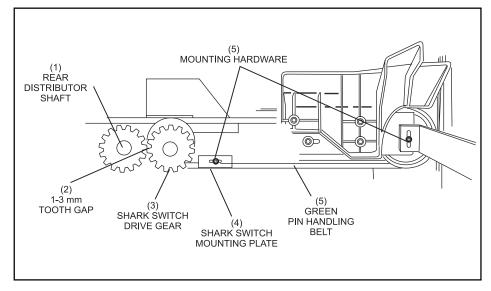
Clearance Between Drive Gear and Spur Gear
